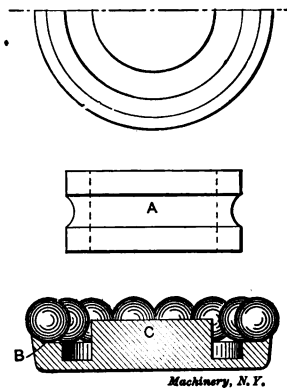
Inner Race and Section through One-half the Cup used in Assembling the R. B. F. Radial Bearing
